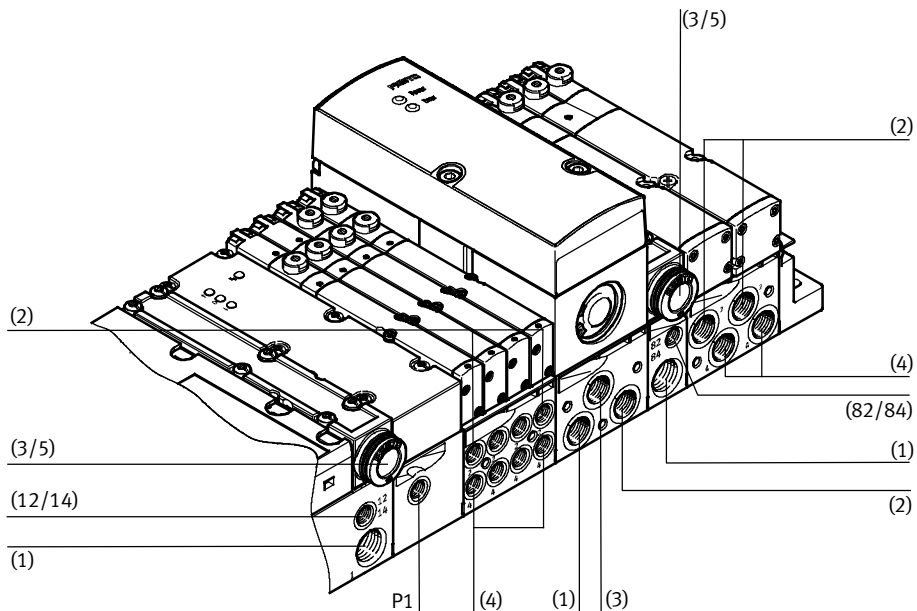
Pneumatic connections of the MPA-S valve terminal
